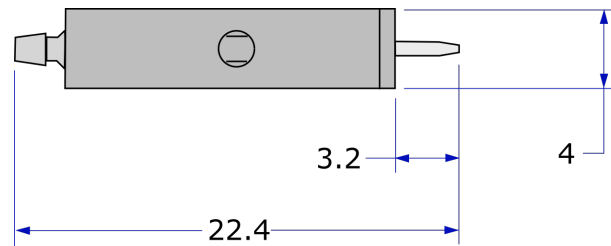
Technical drawing of the MJ-AB microfab nozzle showing the dimensions in millimetres.
